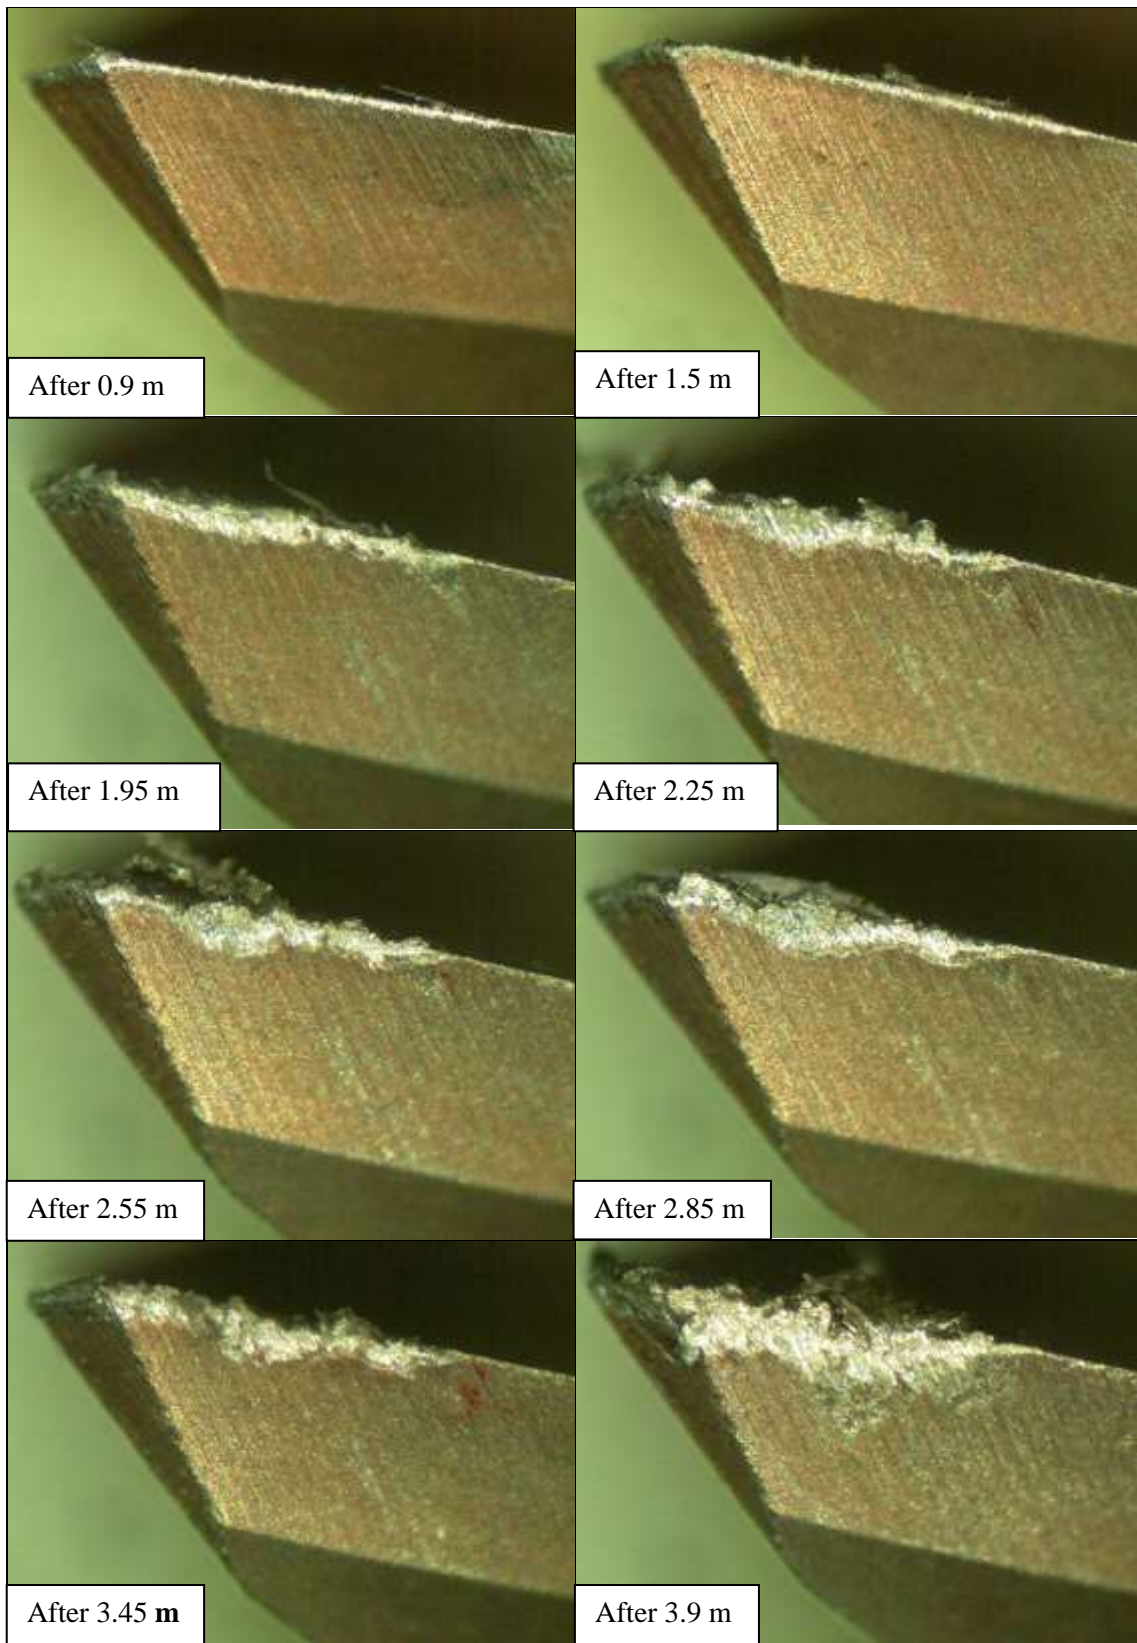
Tool images showing flank wear development until wear criterion for the most affected tooth when machining Ti-6Al-4V at 150 m/min under flood cooling
